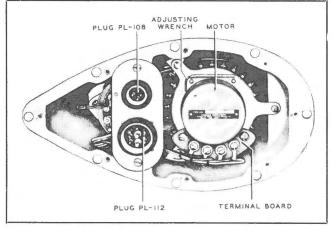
Loop LP-21-() — Bottom Plate Removed
